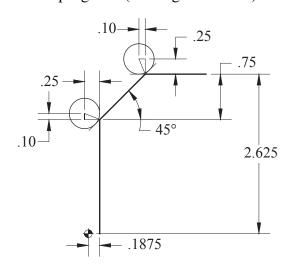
Answer for Calculate Cutter Offset Coordinates
